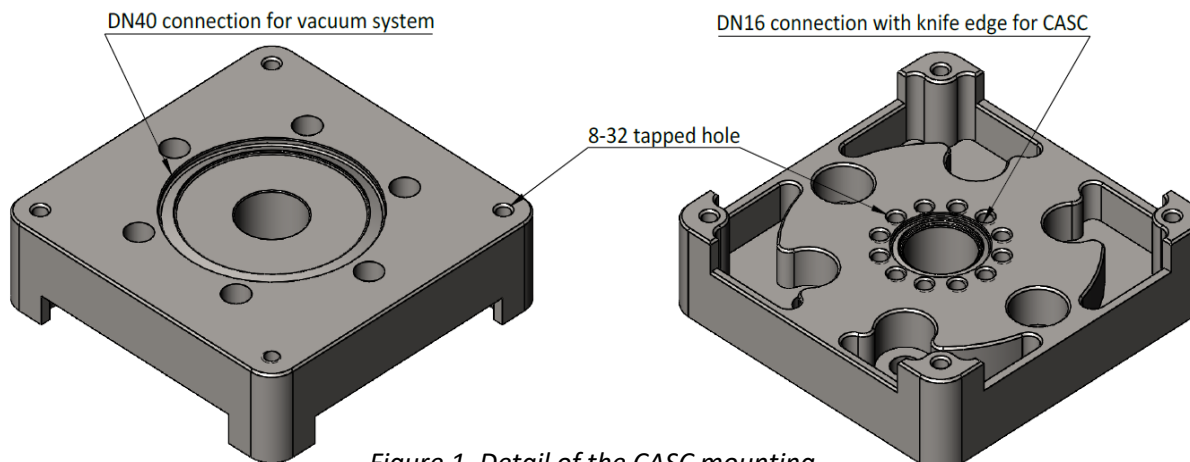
Detail of the CASC mounting plate (CAAPC1) showing the connections for both the DN40 and DN16 flanges.
